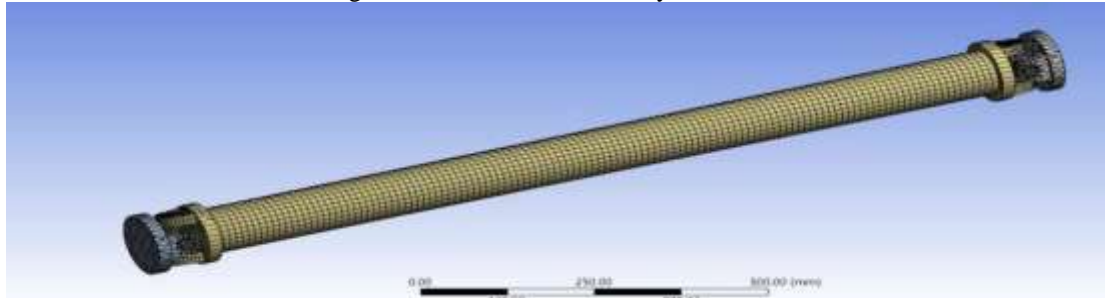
Drive-Shaft Assembly Meshing Into Finite Element Model
